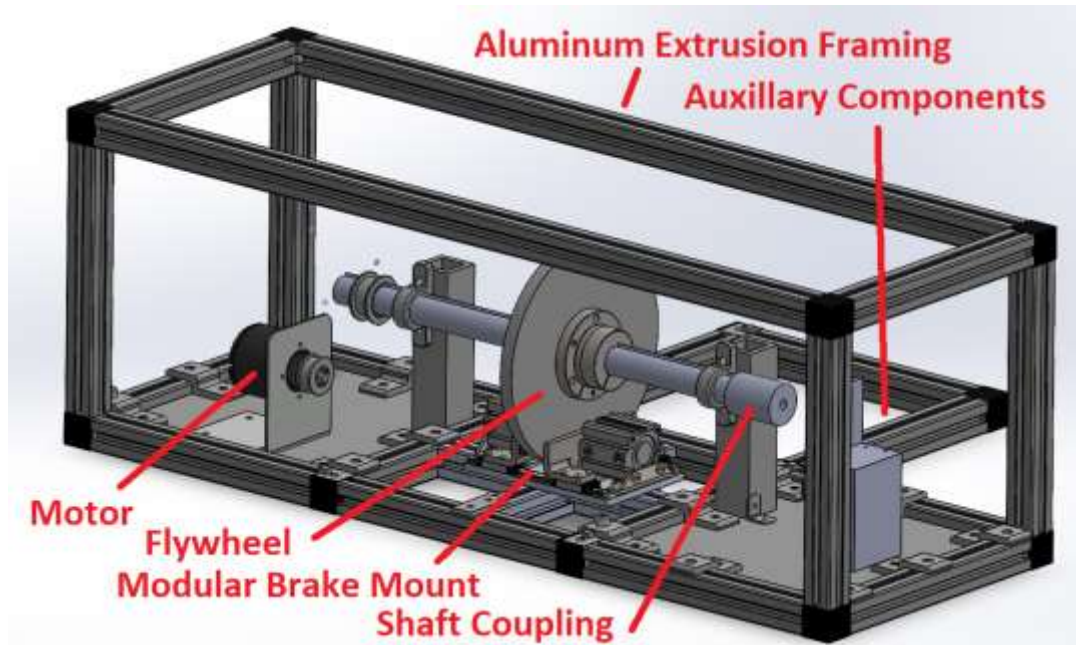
Braking Test Rig with Annotated Components and Mesh Removed
